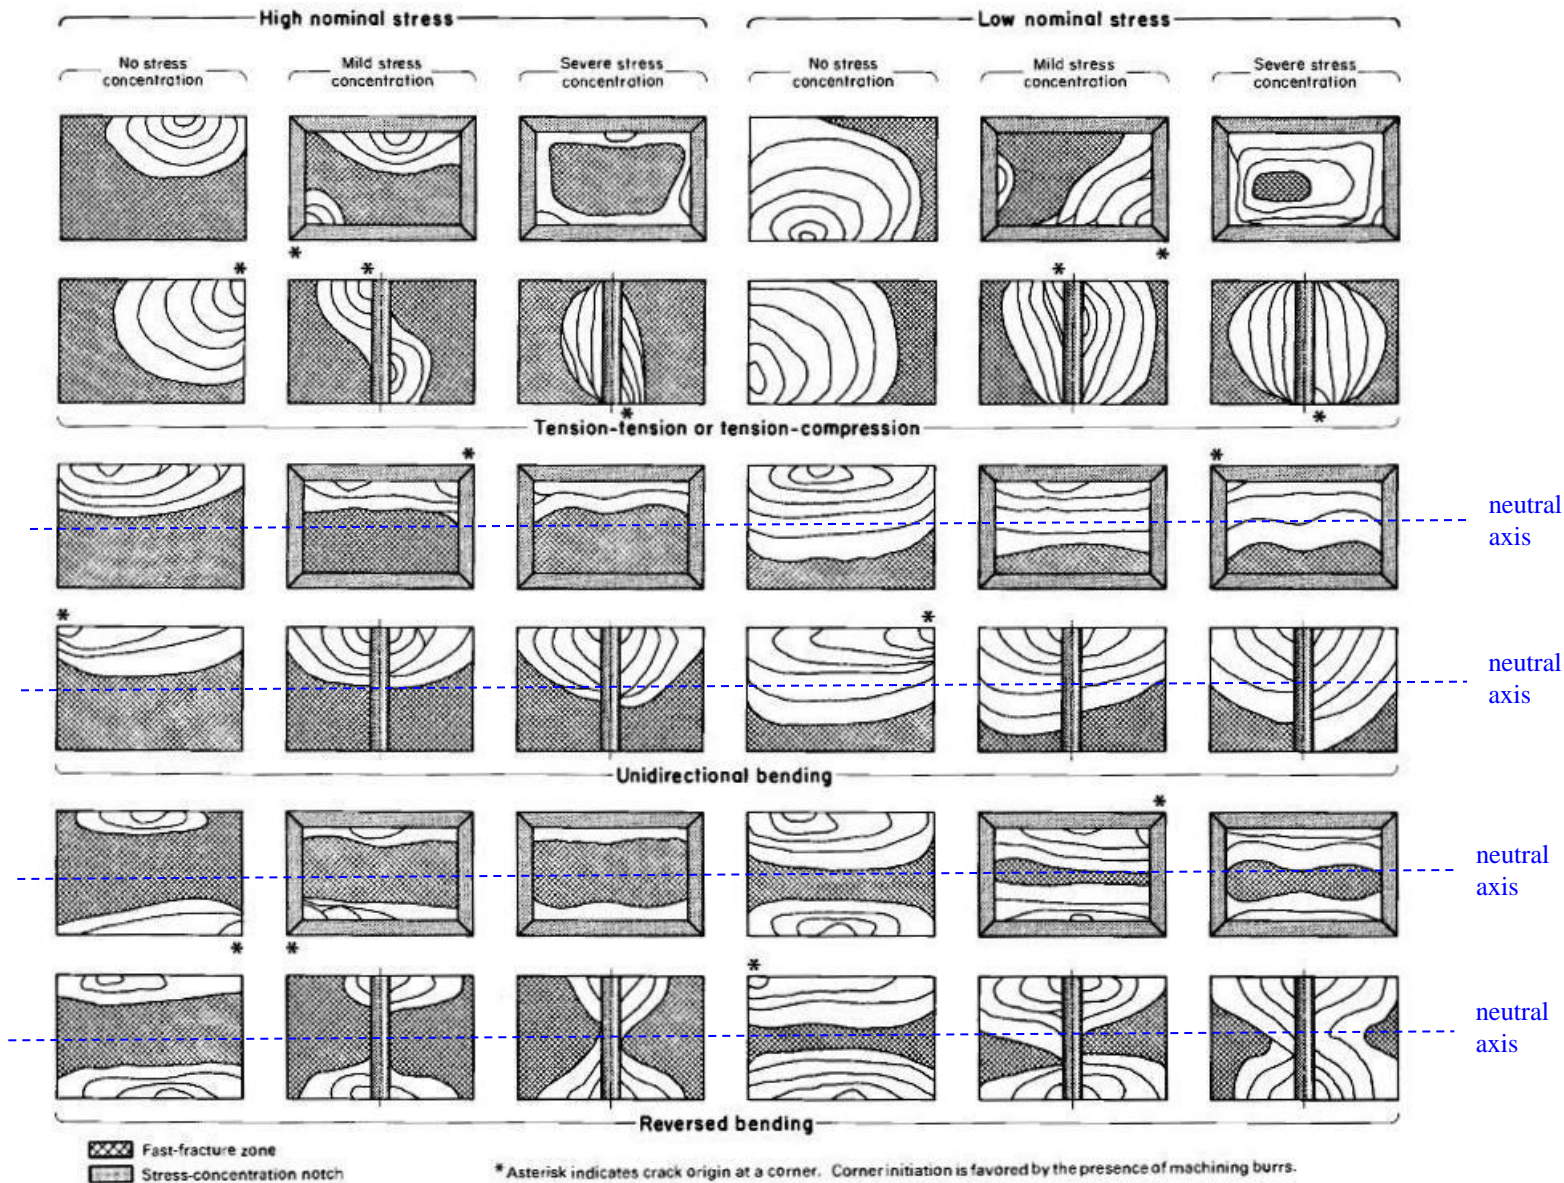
Schematic representation of fatigue fracture surface marks produced in square and rectangular components and in thick plates under various loading conditions
